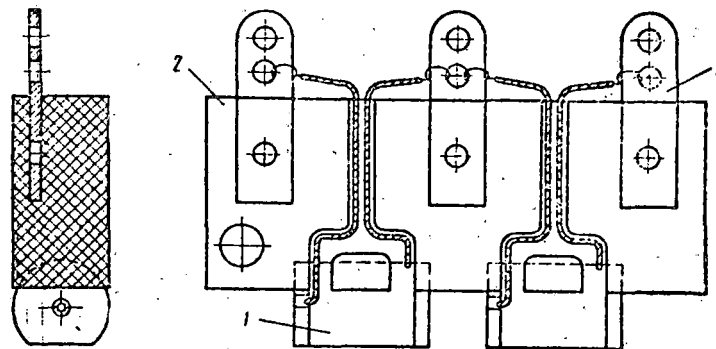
Sketch of the ferroprobe probe assemblies of the MRD-66 flaw detector.
